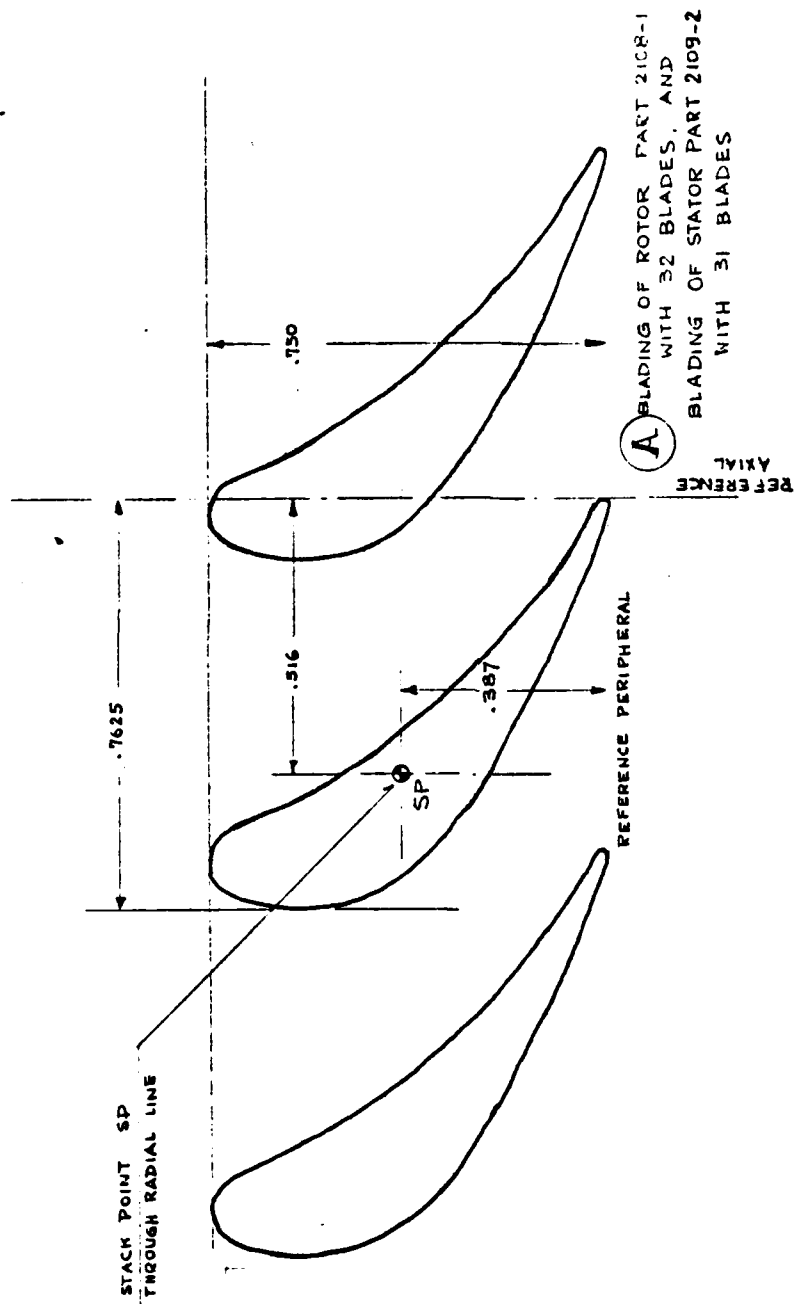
TURBINE ROTOR AND STATOR BLADE SHAPES
